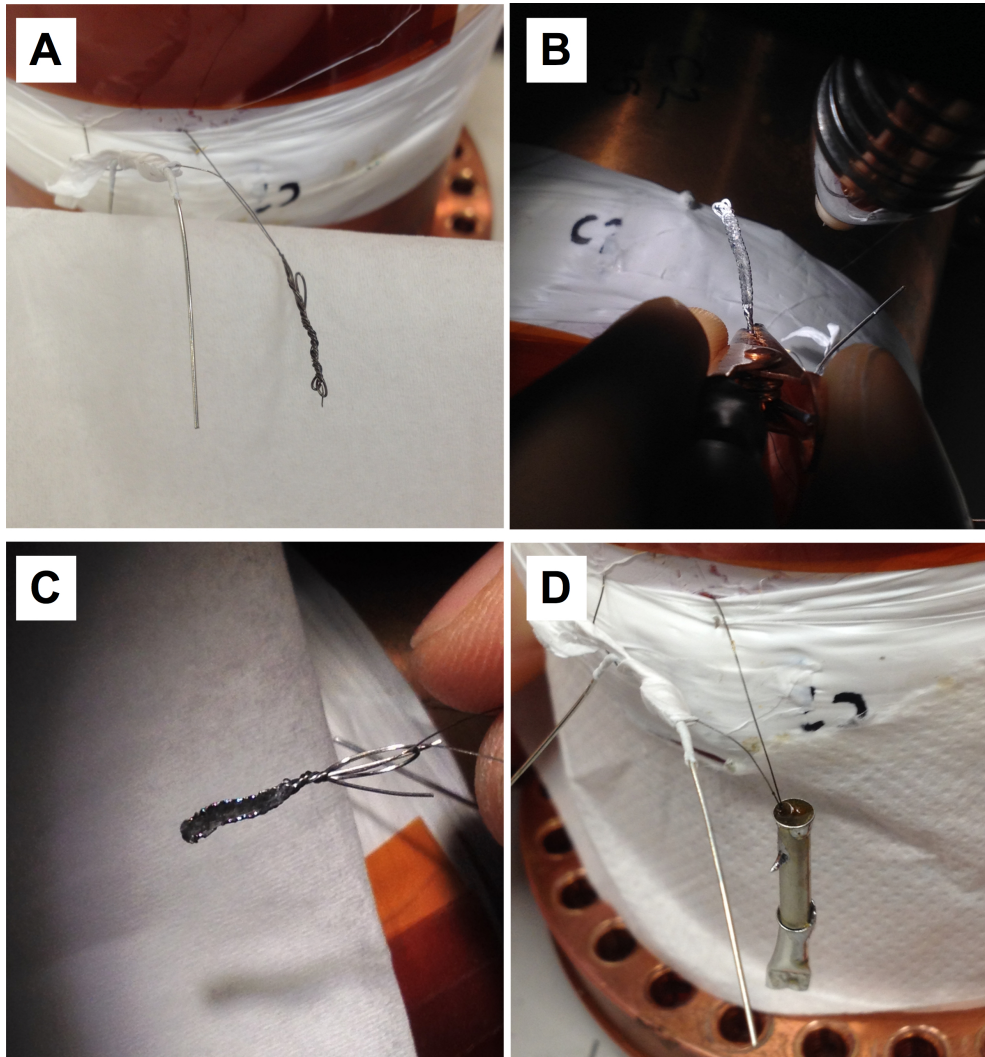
Procedure of the new welding method. (A) Helix made by winding the NbTi wires. (B) The cold-pressed NbTi piece before the arc-welding. (C) The joint after the arc-welding. (D) The joint is fixed with solder in a ferrule. Photo credit: Thomas Arne Hensel.
